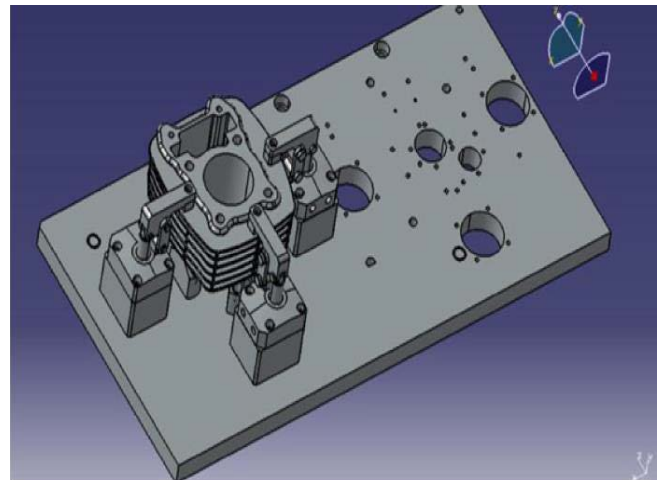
2nd type Fixture assembly with Cylinder block Analysis
